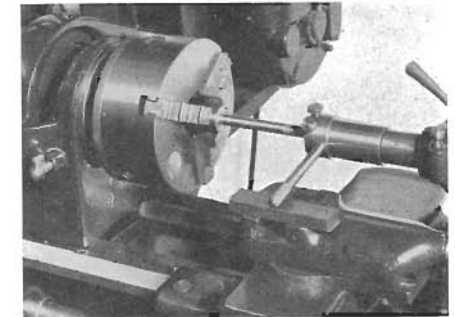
Cutting a Thread with Die-holder in the Tailstock
